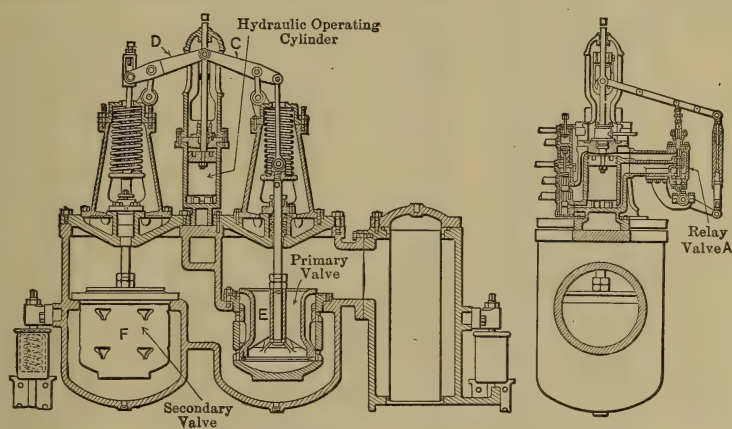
Valve Gear with Oil Relay, Westinghouse-Parsons Turbine.
